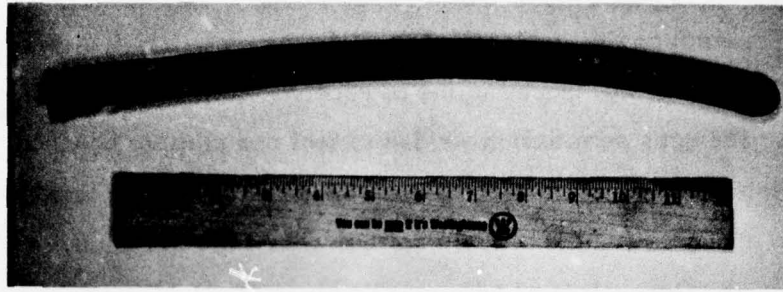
Declad WHfC Prealloyed Powder Compact Hot Pressed at 2300°F and Partially Machined Cannister Which Failed Direct Extrusion at 2300°F
